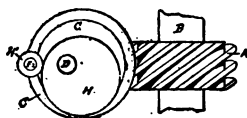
Slightly Modified Form of Roots' Reversible Valve-opening Mechanism (End View).
